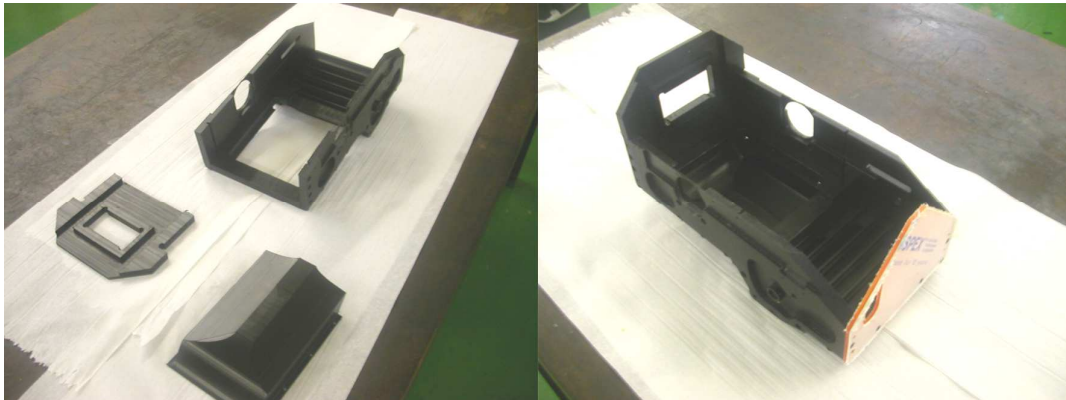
FRAME: PARTIALLY ASSEMBLED (LEFT) AND FULLY ASSEMBLED (RIGHT)
